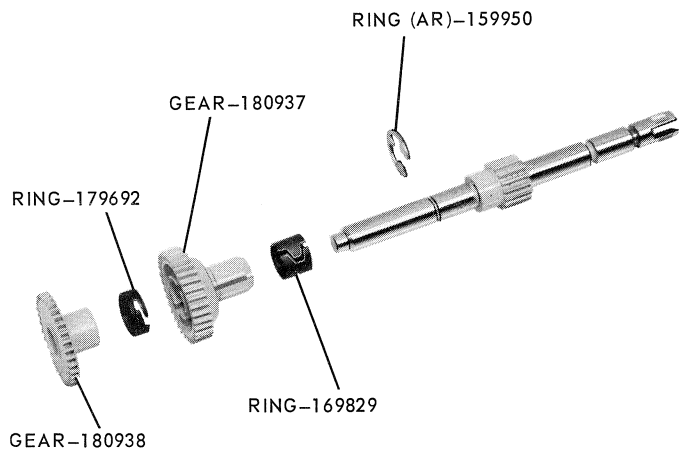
FOCUS SHAFT ASSEMBLY-180917
